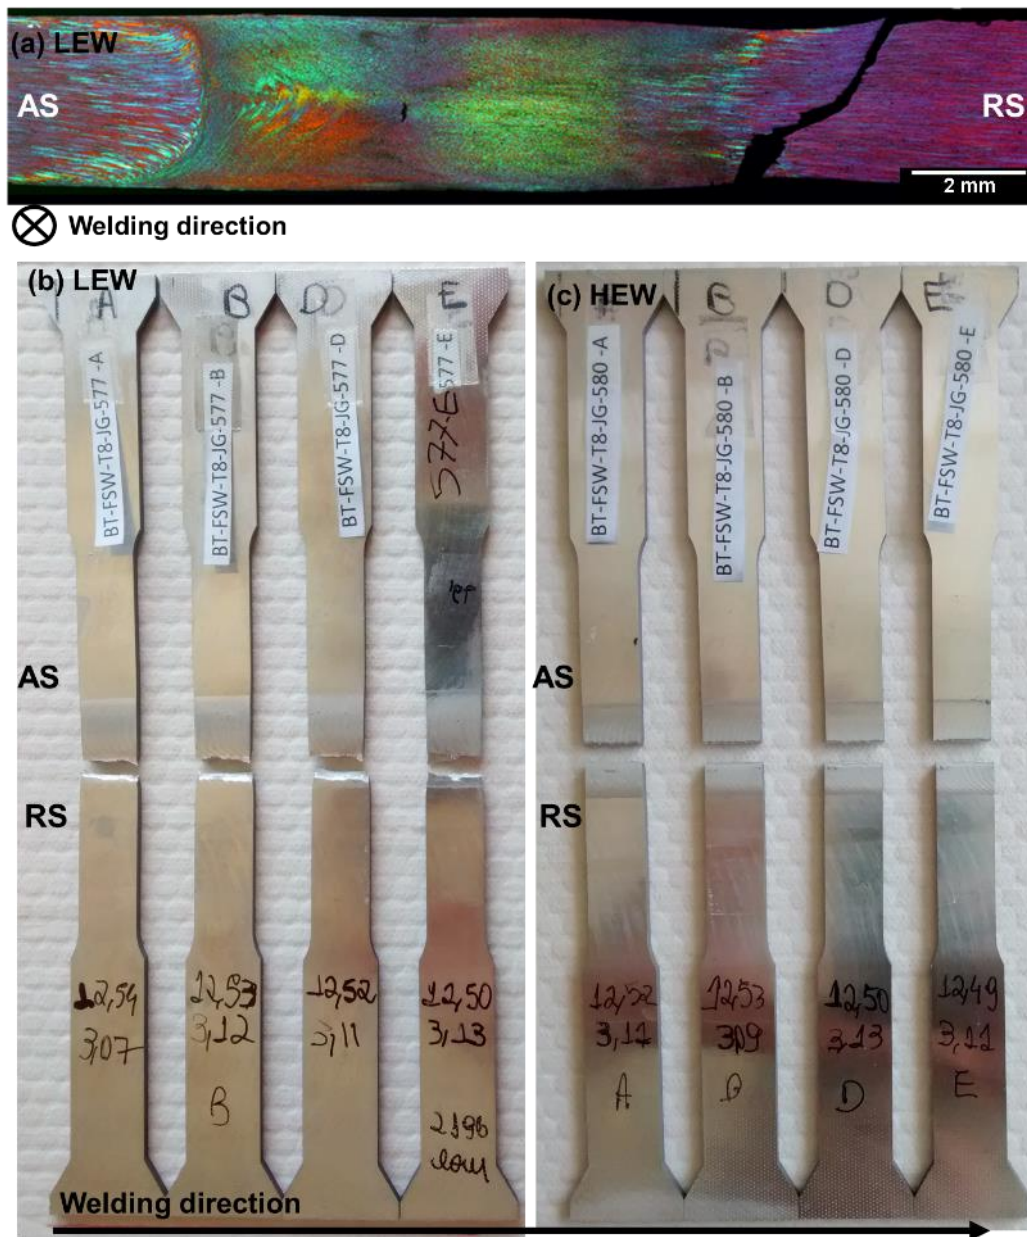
(a) AA2196-SRBT-FSW LEW fracture surface macrograph on optical microscope showing volumetric defects near the welding center and a fracture surface mode IV, at RS trough TMAZ. (b) Post tensile picture of (a). (c) Post tensile picture of AA2196-SRBT-FSW HEW sample that fractured in mode I.
